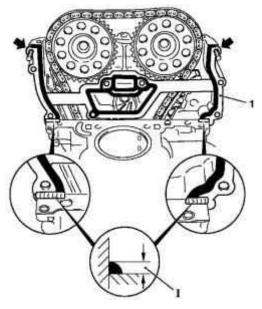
The experimental setup is laying on top of body mechanism Timing: 1 - upper gasket, 2 - tourniquet
